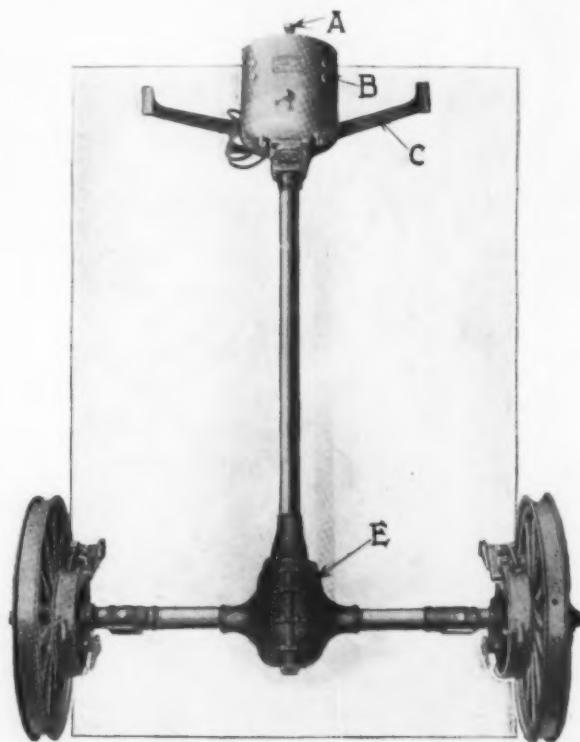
A, Motor shaft, which drives countershaft by means of silent chain; B, Motor; C, trunnion, which supports motor and countershaft by means of a ball joint; D, tube inclosing propeller shaft; E, Bevel-Gear Housing.
